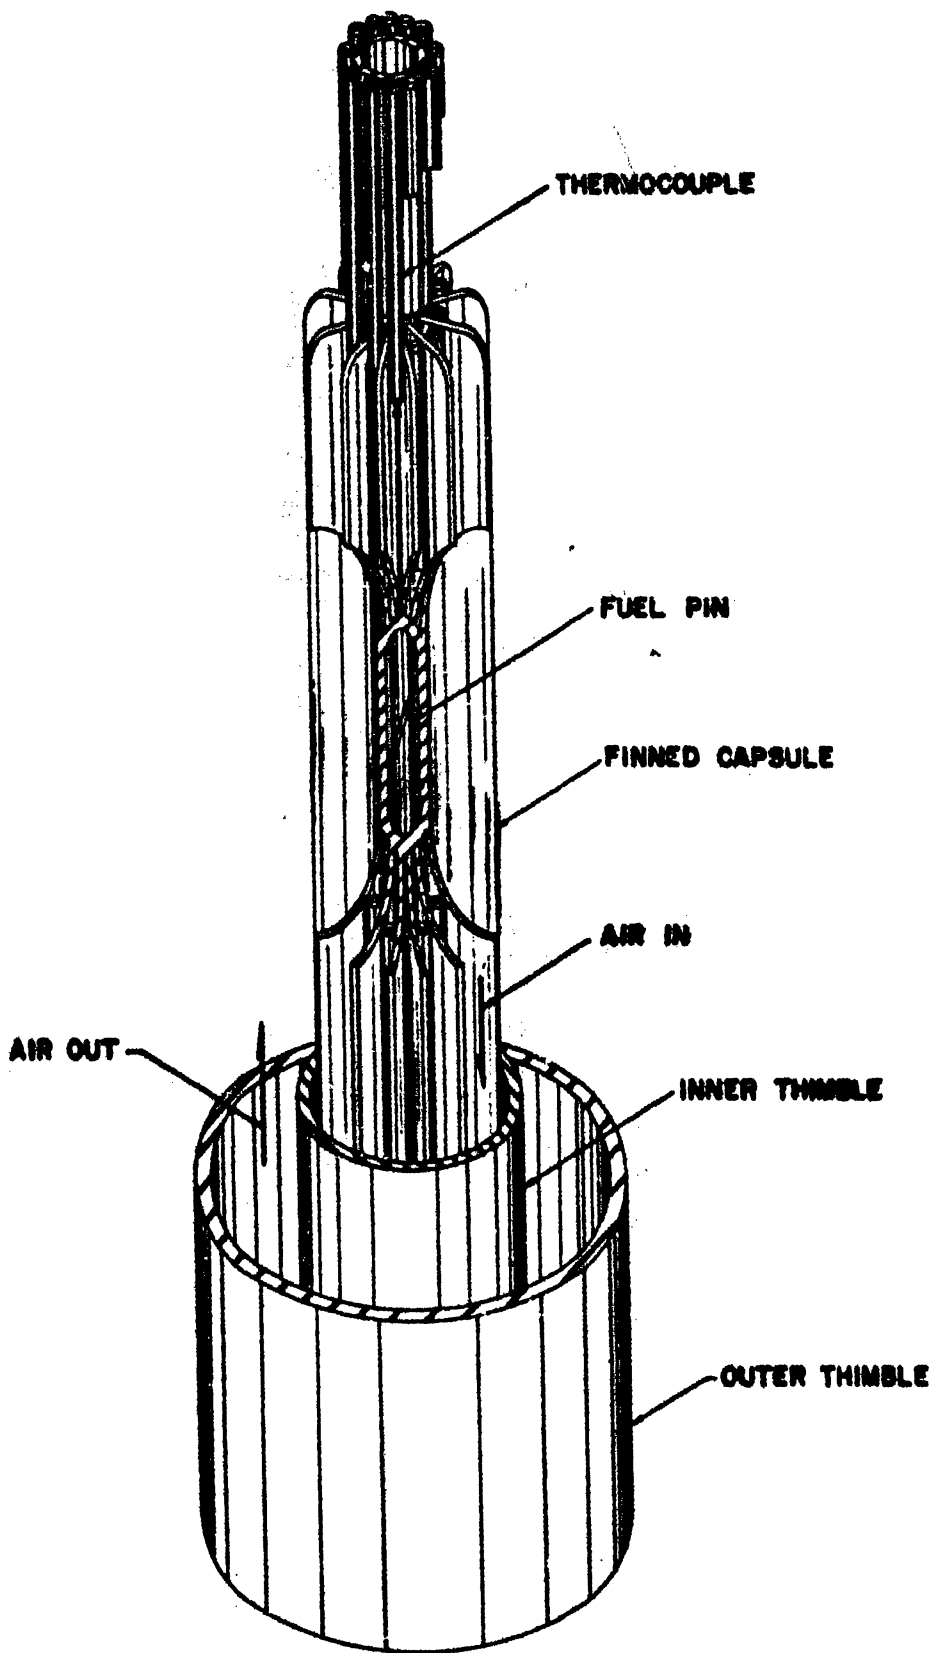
CUTAWAY VIEW OF CP-5 CAPSULE
